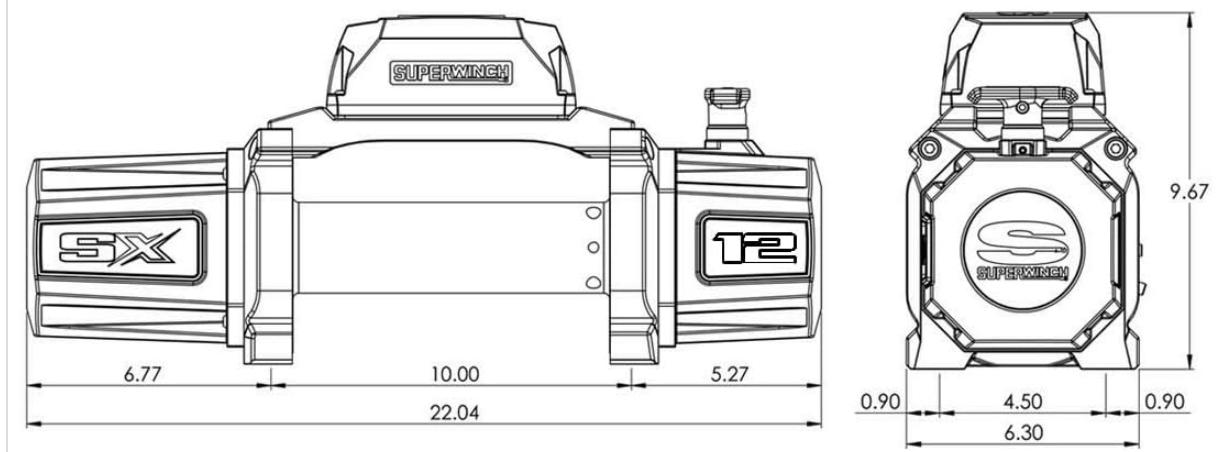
Winch Dimensions. A technical drawing showing the length, width, and height of the Superwinch SX12 winch with detailed measurements.
